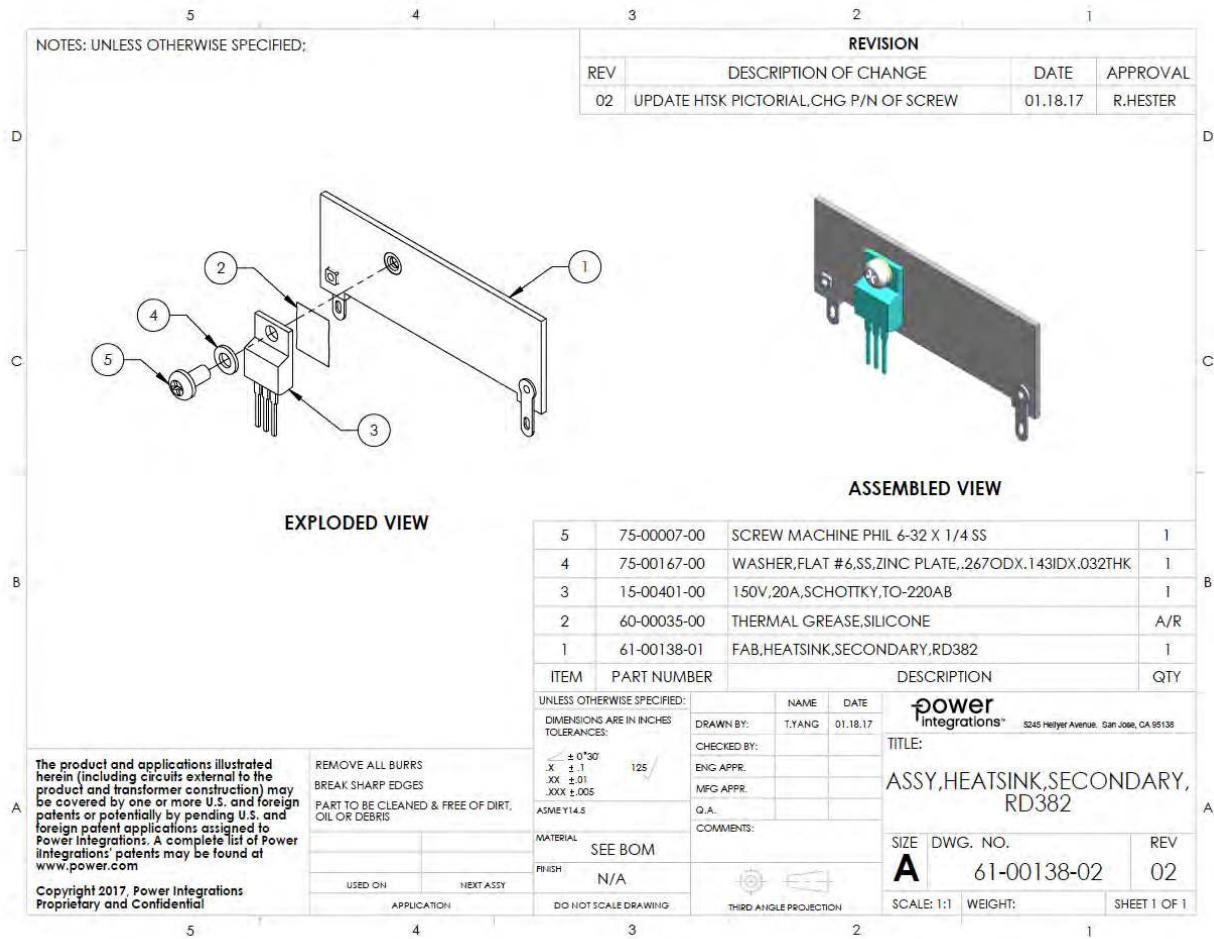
RD-382 Secondary Heat Sink Assembly.
